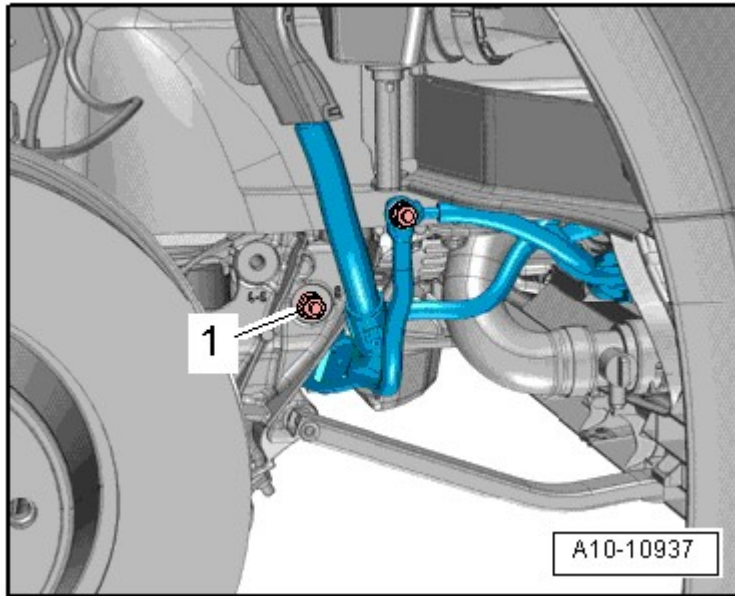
Identifying Nut And Bracket With Wiring Harness From Subframe
